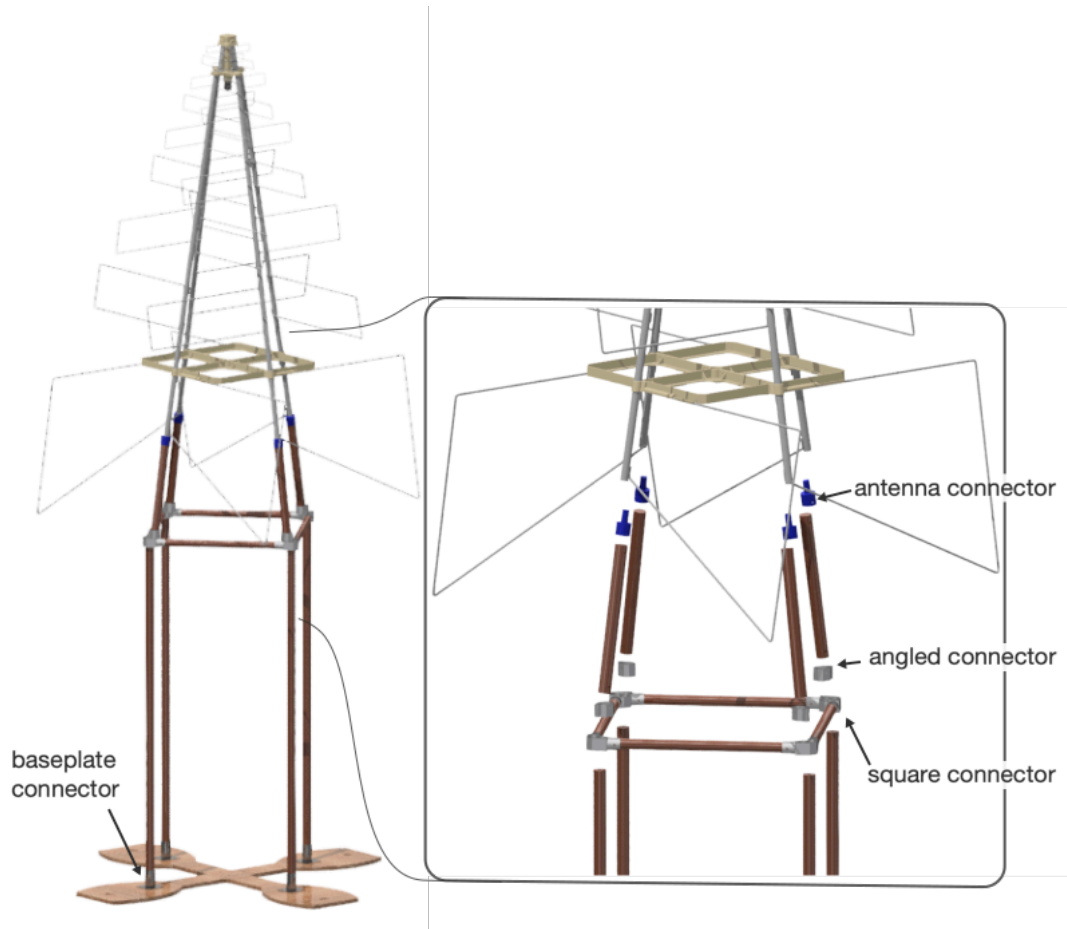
CAD drawing of the assembly of the mount v2 with a close-up on the pyramidal part.
